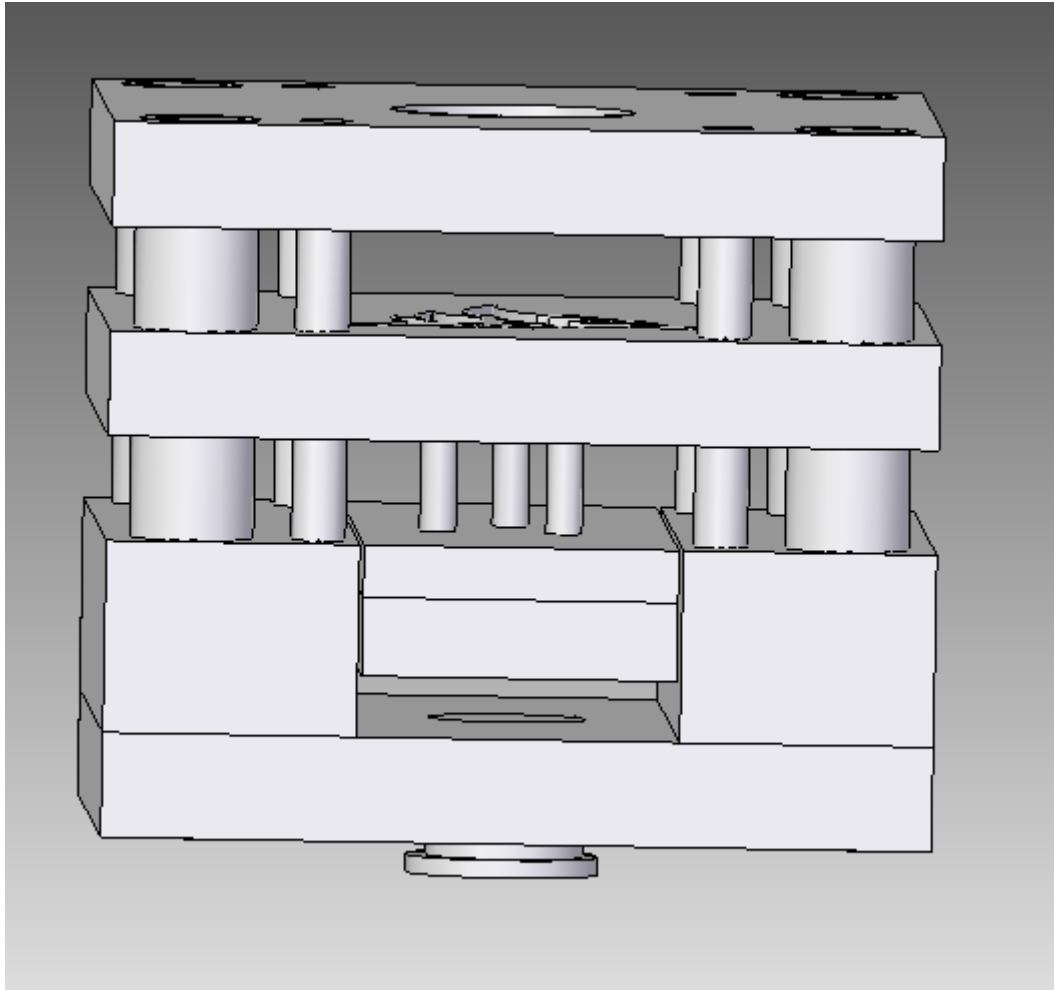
Exploded Mould design for ARC- Key [Drawn by Author in Solid Edge]
